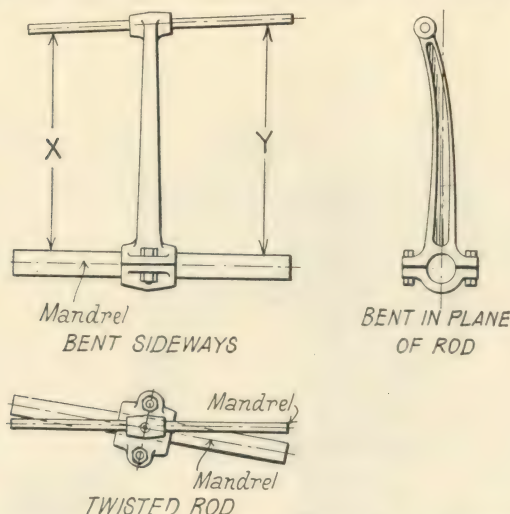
CHECKING CONNECTING-ROD FOR ALINEMENT
